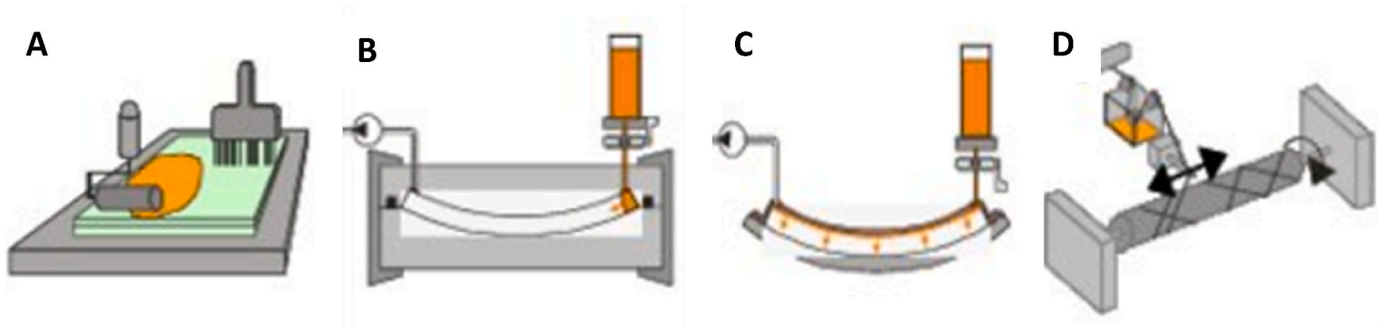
Typical layouts of Some of the Significant Fabrication Methods (Mahrholz et al., 2003) [66] (A) Hand Layup method, (B) Resin Transfer, (C) Resin Infusion, (D) Filament winding.
